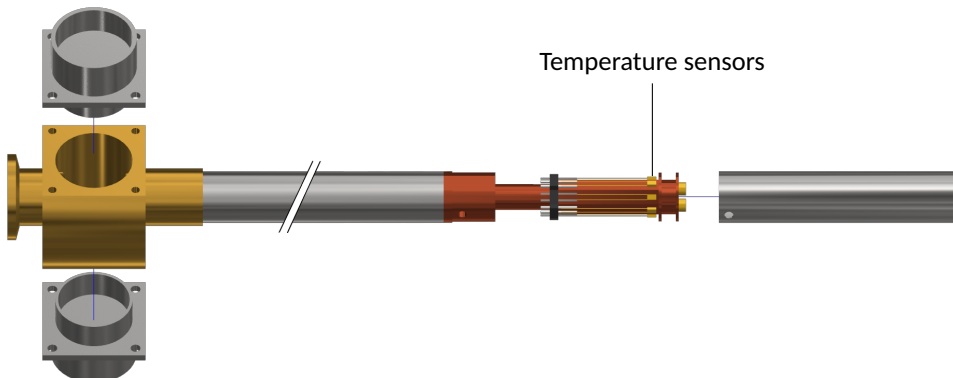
Temperature sensor calibration probe assembly drawing. Temperature sensors are the small golden pieces on the copper mounting part. Length of the probe has been reduced for easier viewing. The middle stainless steel $\varnothing 18$ mm pipe is 1300 mm long for the probe to reach the bottom of LHe Dewar.
